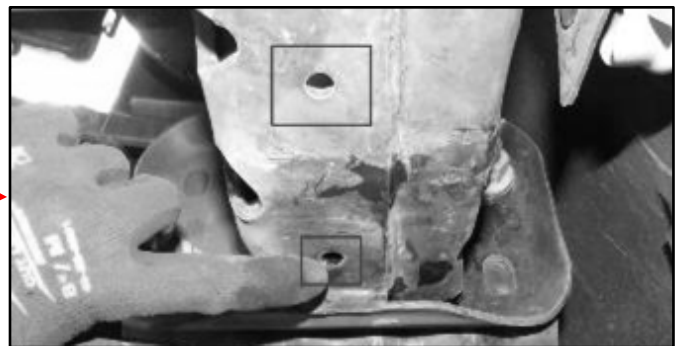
Remove the skid plate by removing the PS bolt that mount the skid plate to the frame
